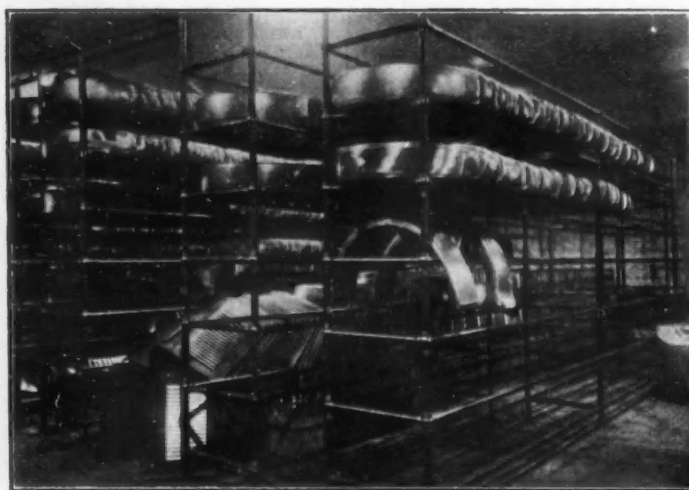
PIPE RACKS USED FOR THE STORAGE OF FENDERS AND SHEET-METAL PARTS
